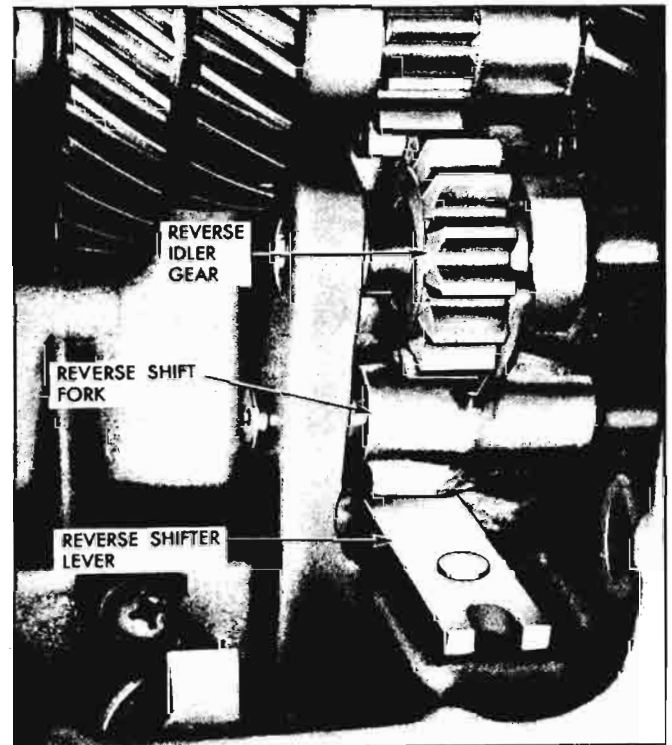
D-50—Installation of Reverse Shifter Lever, Shift Fork, and Reverse Idler Gear
